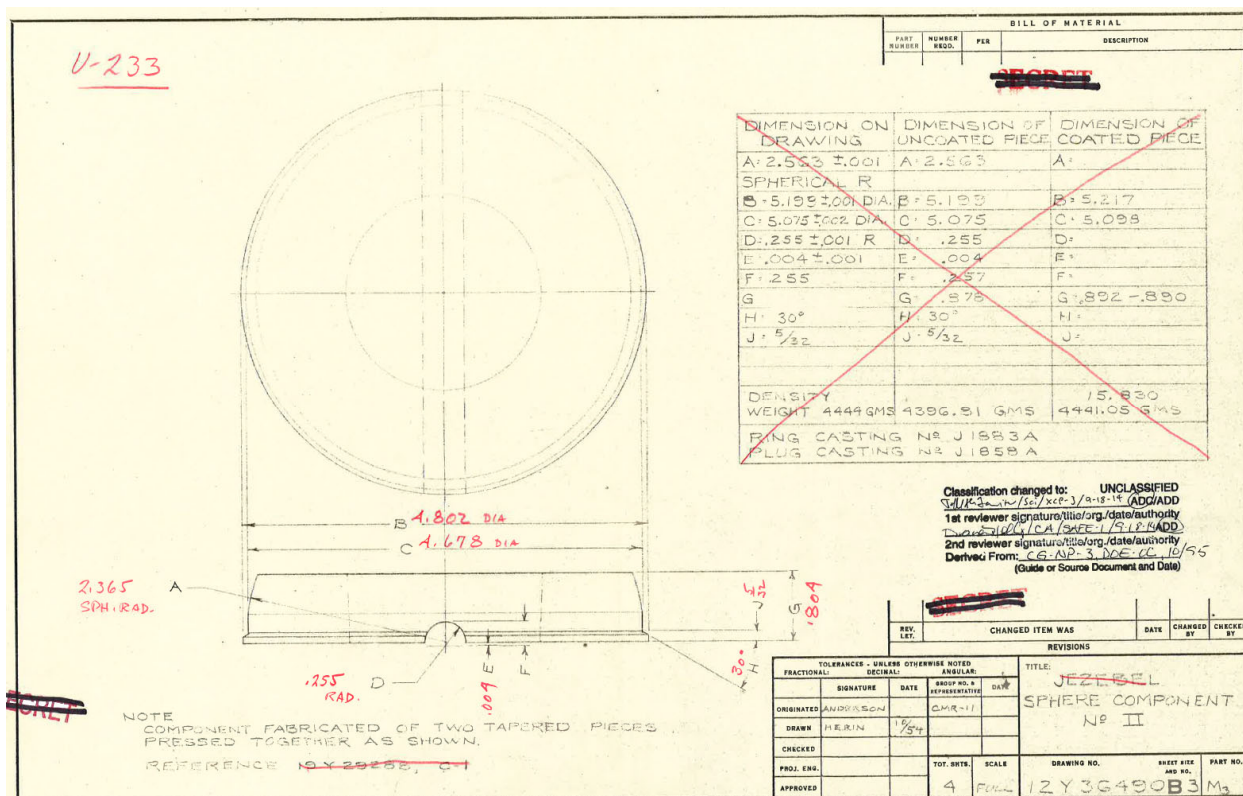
"Jezebel Sphere Component No. II," Drawing 12Y36490 B3, October 1954.
